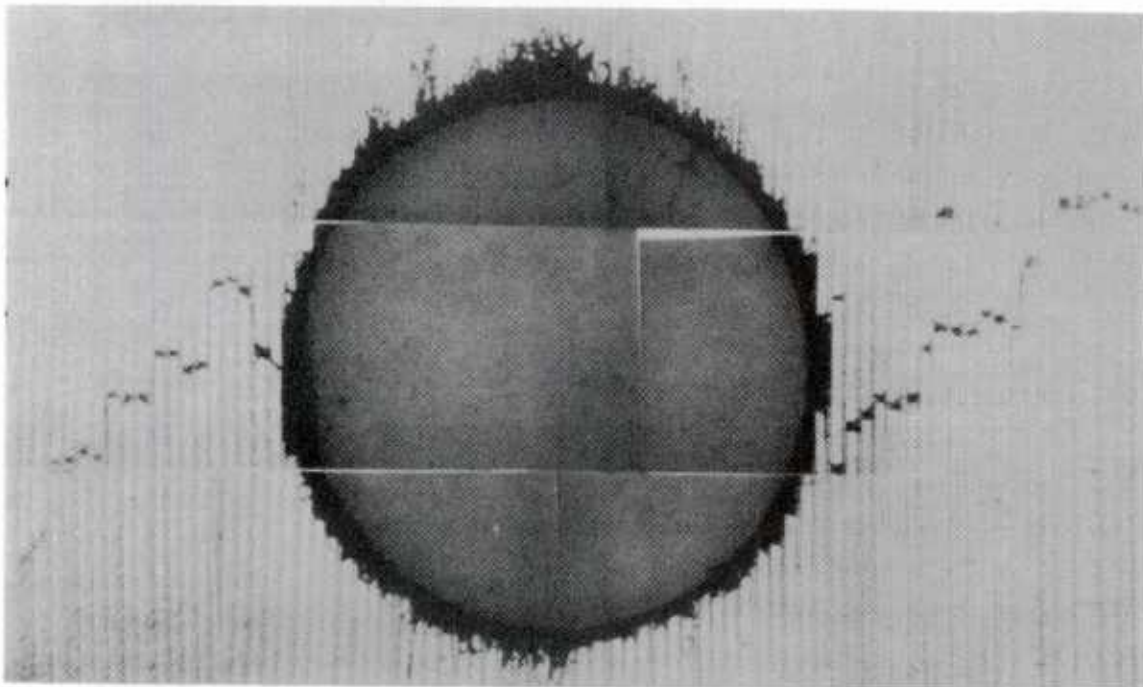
Fatigue Crack Growth in Countersink Hole Specimen
